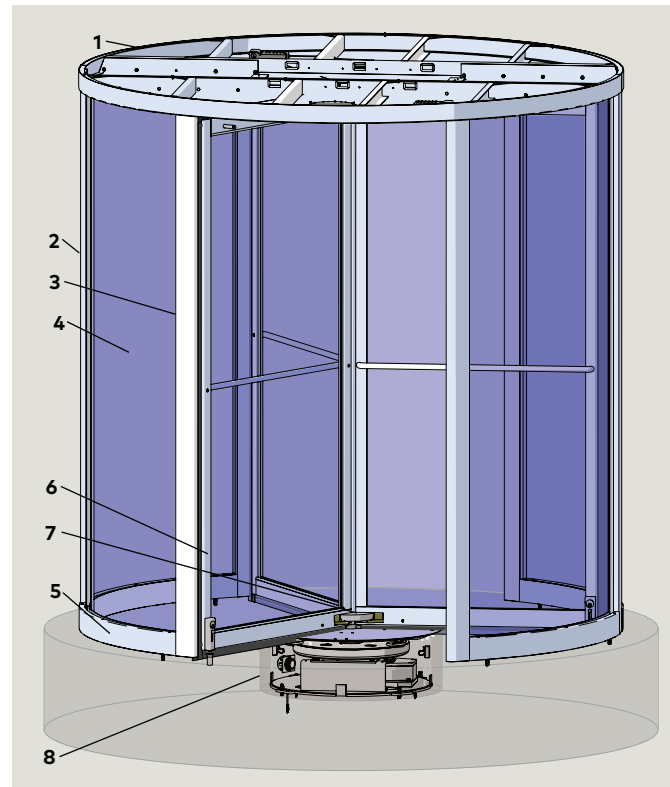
Steel shaft assembly, 3 wing door
